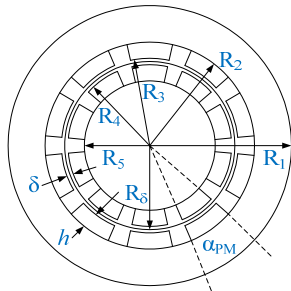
Dimensions of cylindrical magnetic coupler in a cross-section.
